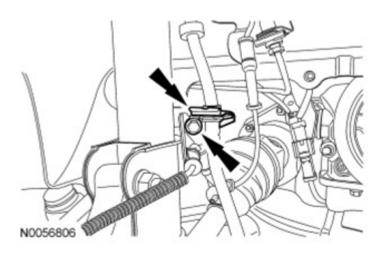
Locating Brake Hose Retainer And ABS Sensor Retaining Bolt Courtesy of FORD MOTOR CO.
